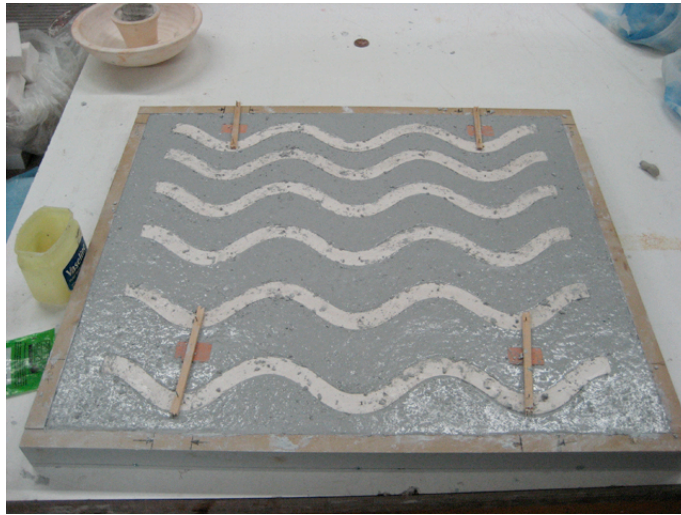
Concrete cast in mould level with plaster forms, the 4 orange blocks visible are for hanging.
